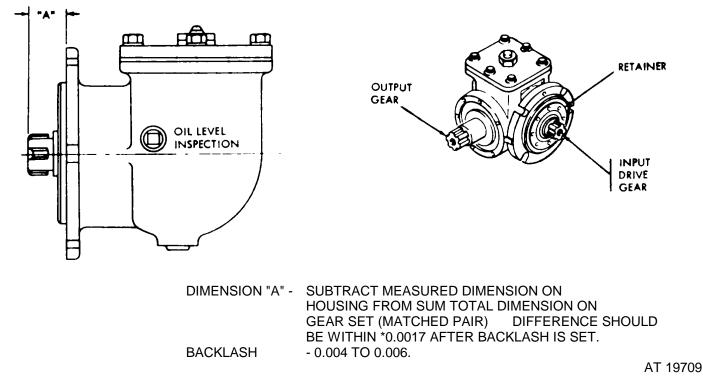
Adjustment dimensions for right-angle drive take-off.
